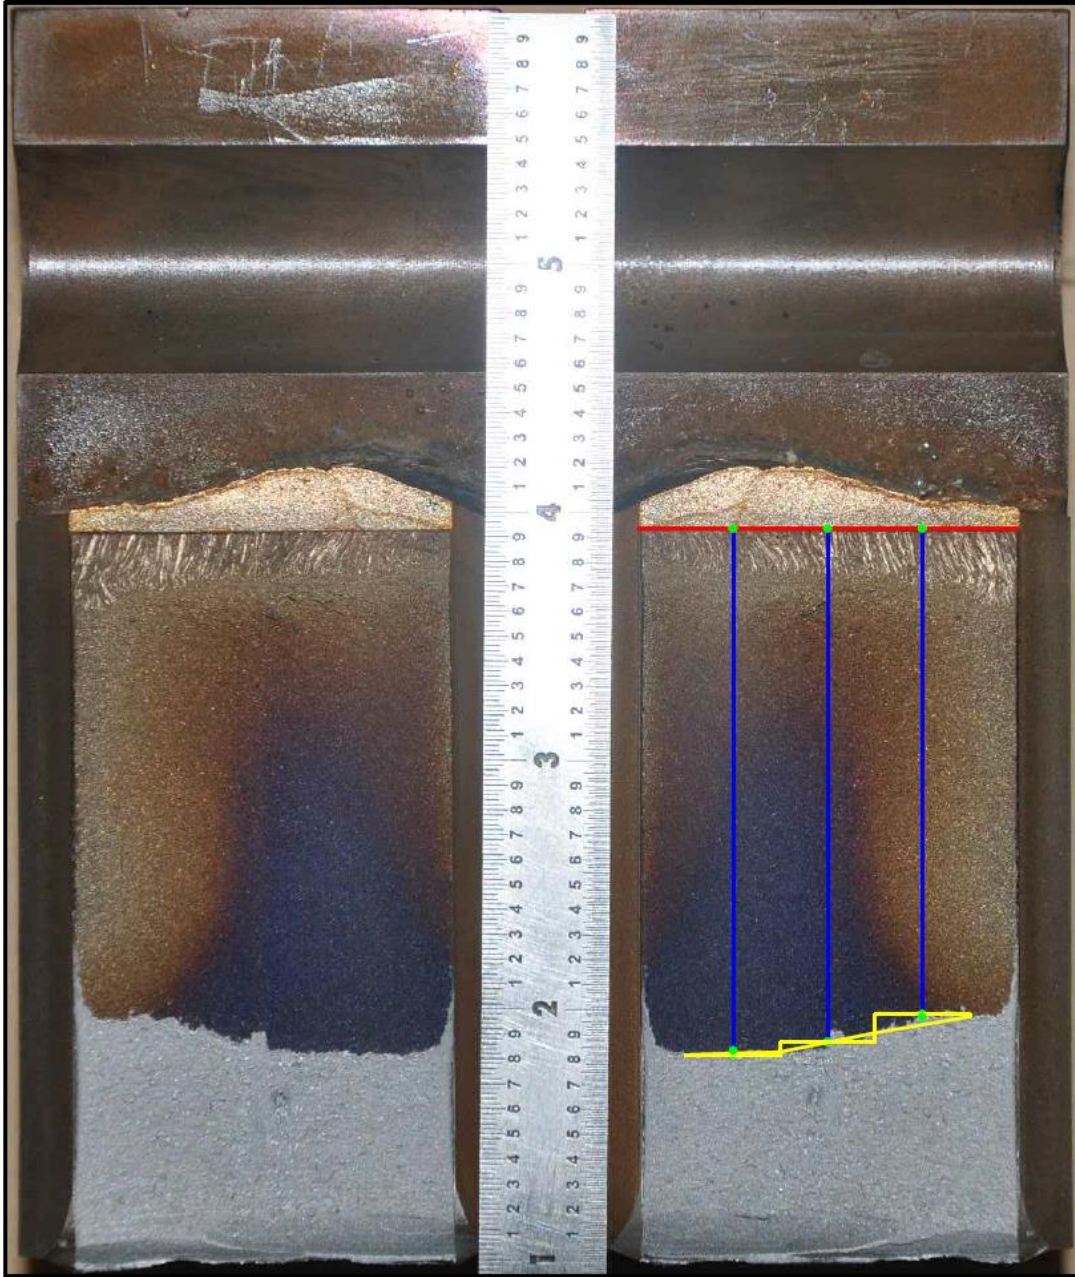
Specimen F5a Fracture Surface
